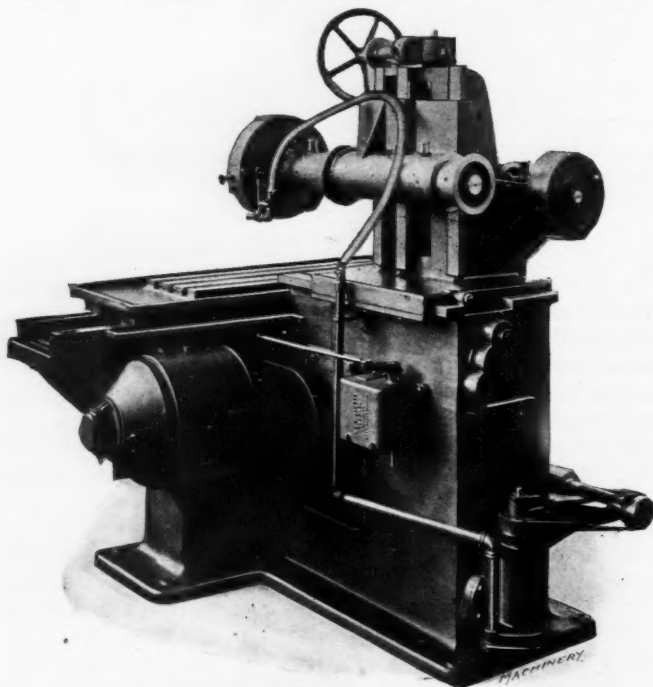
Diamond Motor-driven Surface Grinding Machine
